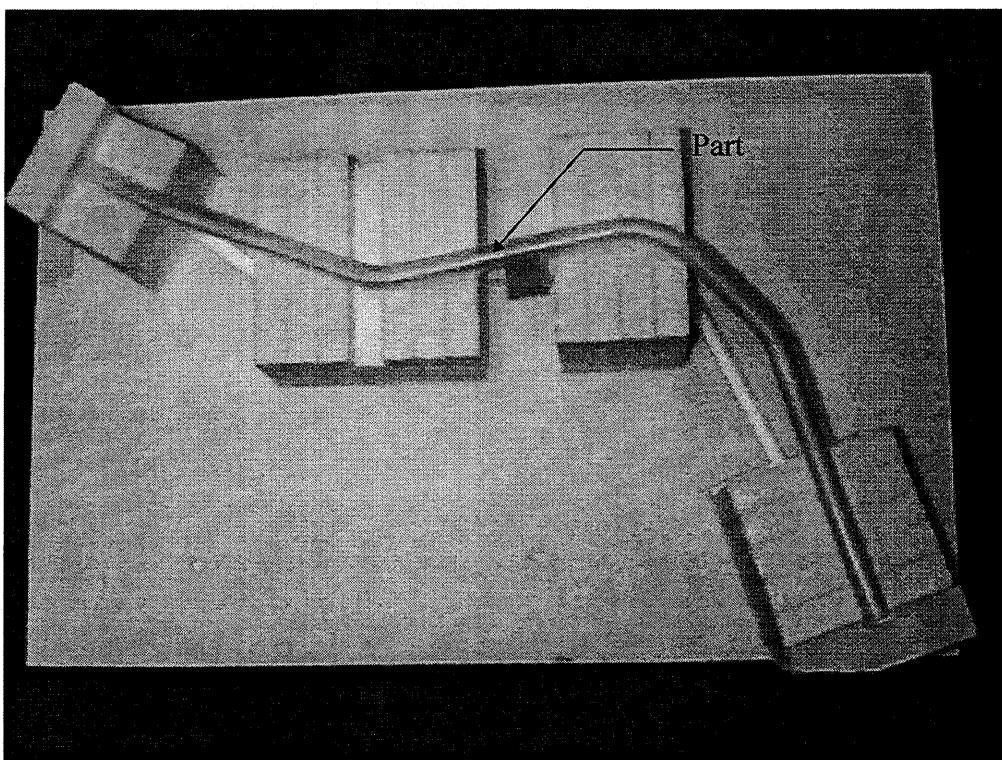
Top view showing the assembled Multiple Tower fixture. The part rests in the tower grooves.
